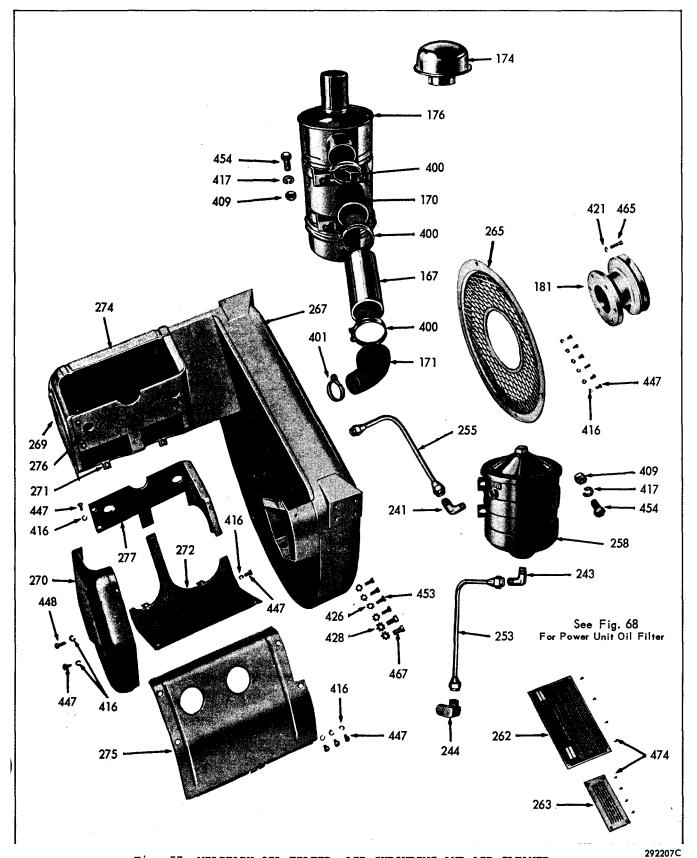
, MILITARY OIL FILTER, AIR SHROUDING AND AIR CLEANER Parts are identified by reference number. See parts list for correct part number.
